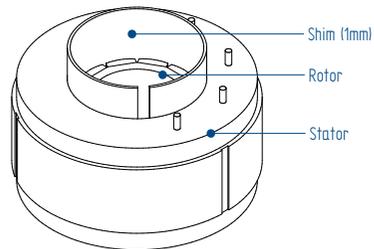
Rotor and stator packaging of QTR 65 and QTR 78
